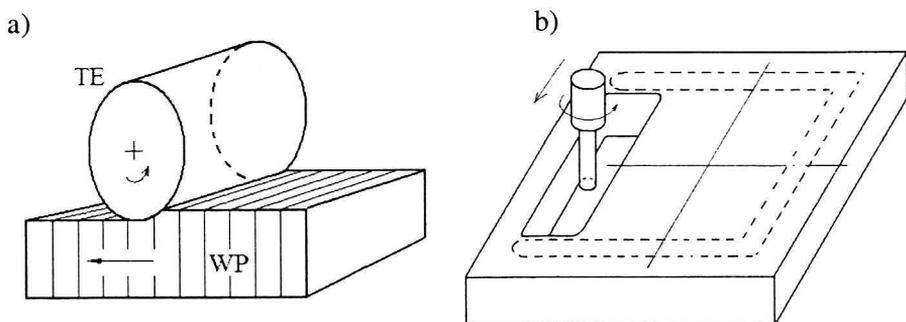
Example of machining using rotating tool electrode (TE). a) Machining of pocket samples; b) Contouring by REDM
